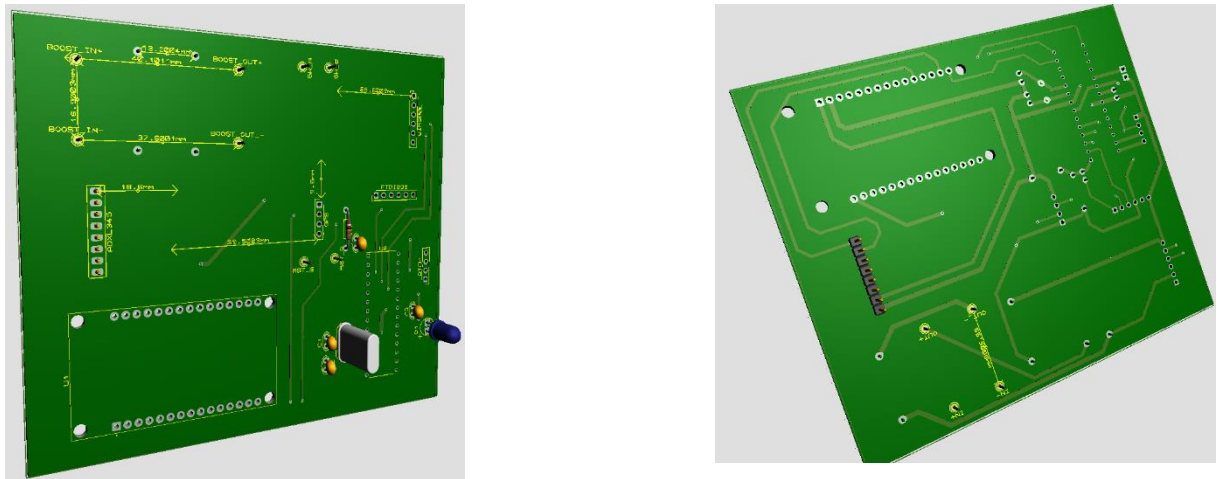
TOP and BOTTOM view of PCB in 3D visualizer
